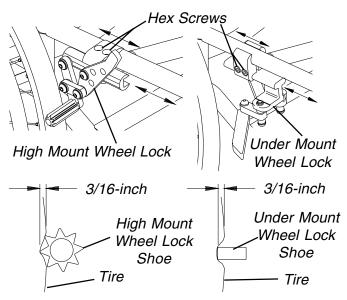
WHEEL LOCK ADJUSTMENT/REPLACEMENT
